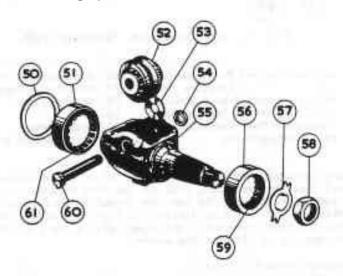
ROCKING SHAFT ASSEMBLY, "EXPLODED" VIEW.
